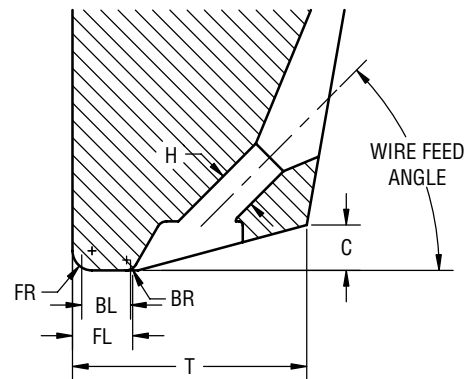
Cross-sectional view of a Maxiguide wedge with standard dimensions identified
